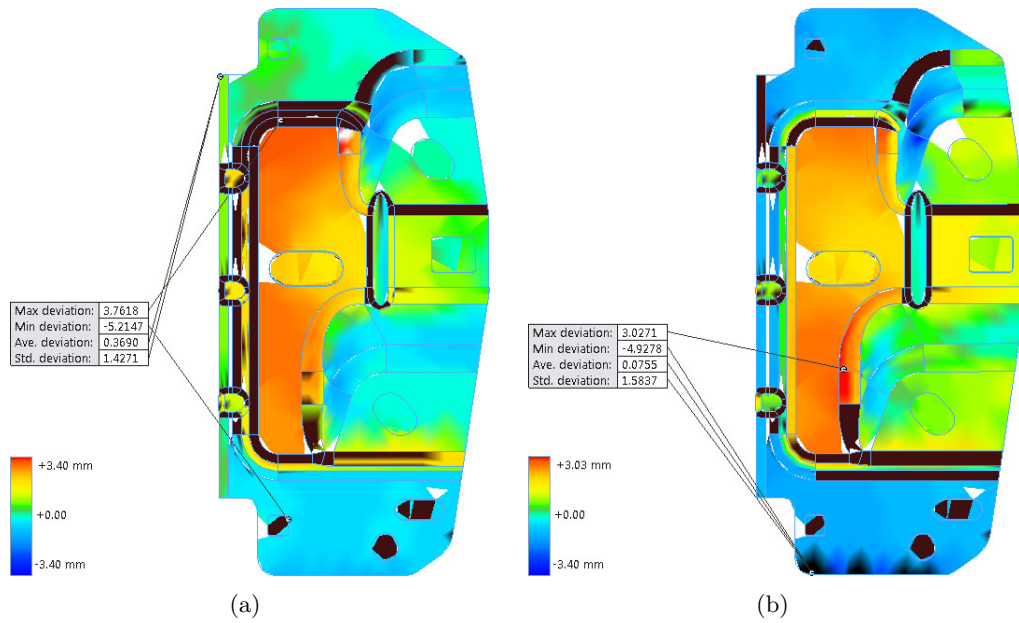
Car fender fixture prototype dimensional measurement: (a) manufacture option 1 - constant step down, (b) manufacture option 2 - constant crisp height
